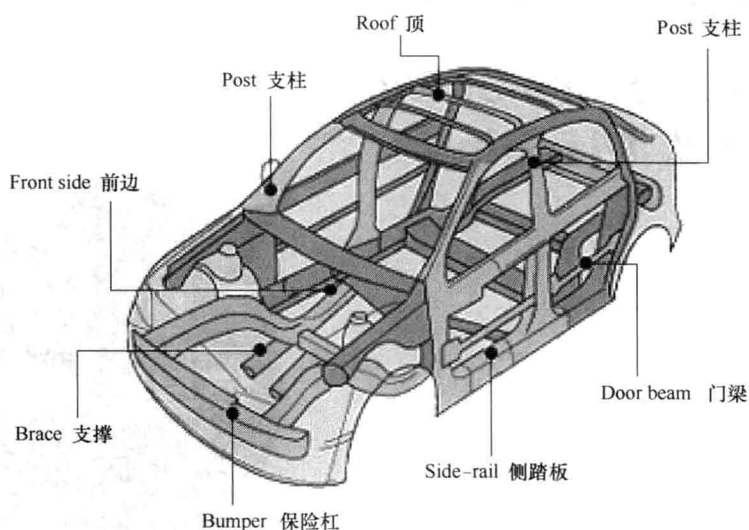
Stamping parts in the frame of automobile 汽车框架的冲压件
